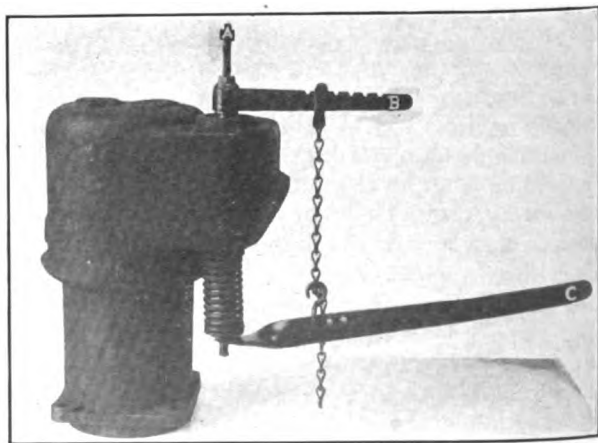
Winsor Adjustable Valve Remover Adaptable to Any Type of Motor.
